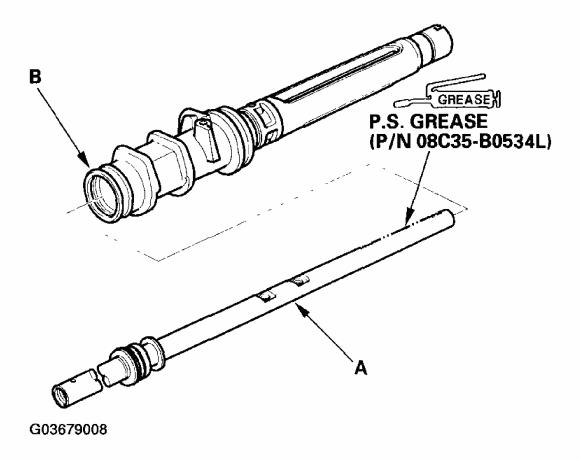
Inserting Steering Rack Into Cylinder Courtesy of AMERICAN HONDA MOTOR CO., INC.
